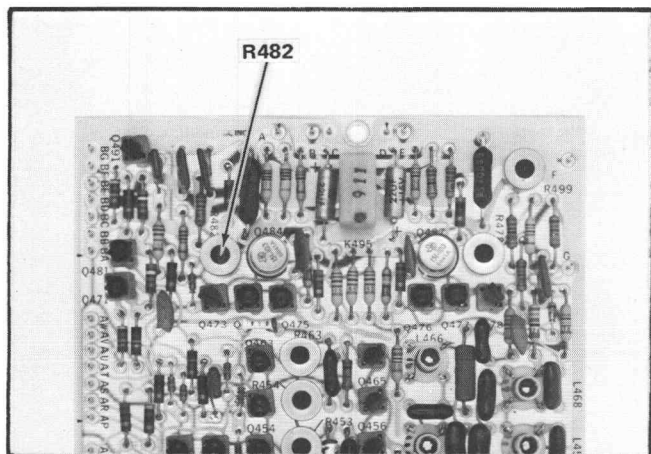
Bar Drive and Video Out board adjustment location.
